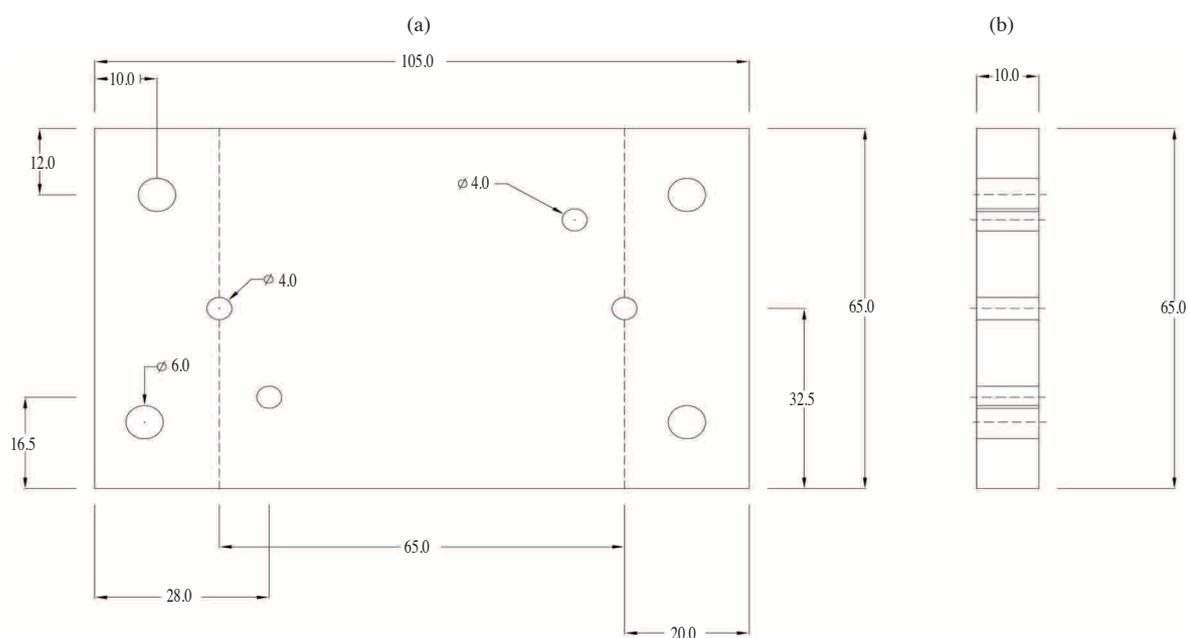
Diagram of end plate: (a) front view (b) side view. All dimensions are in mm.
